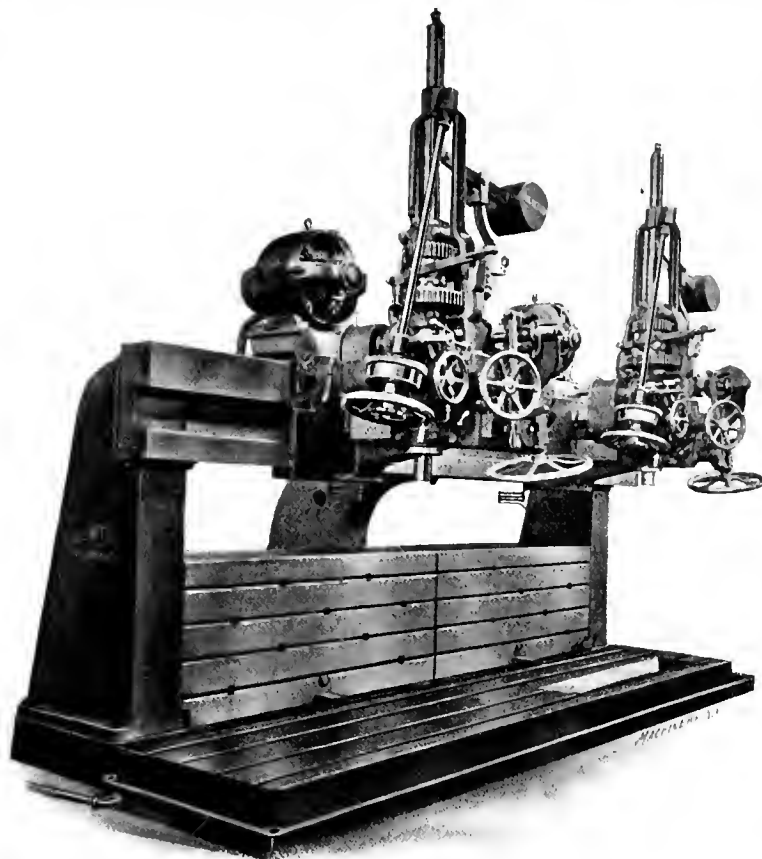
Front View of Newton Two-spindle Locomotive Frame Drilling Machine
